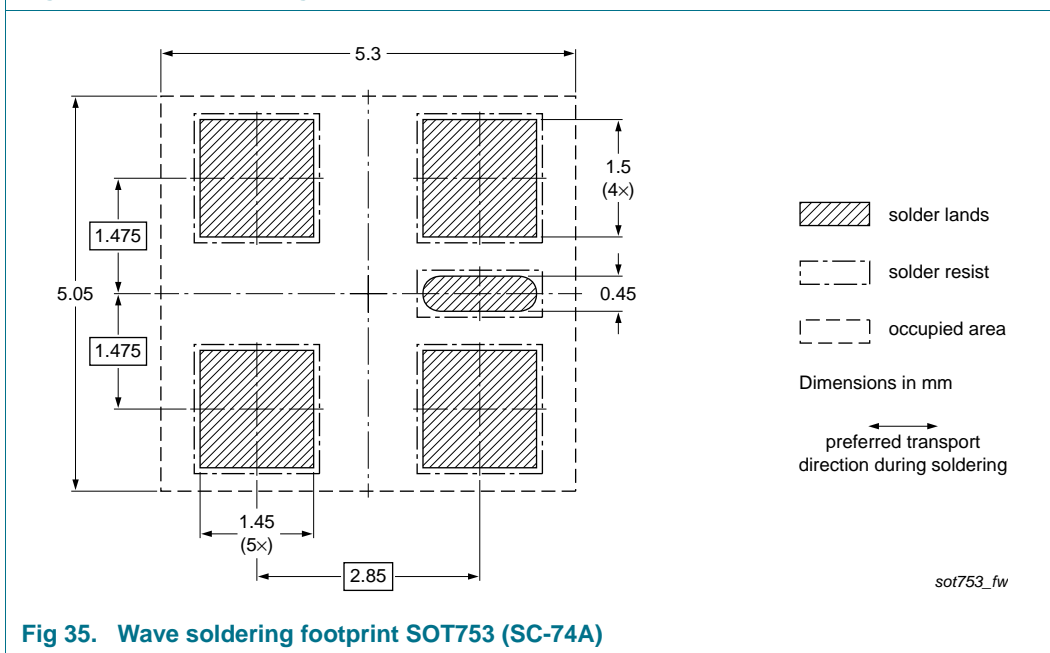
Wave soldering footprint SOT753 (SC-74A)
